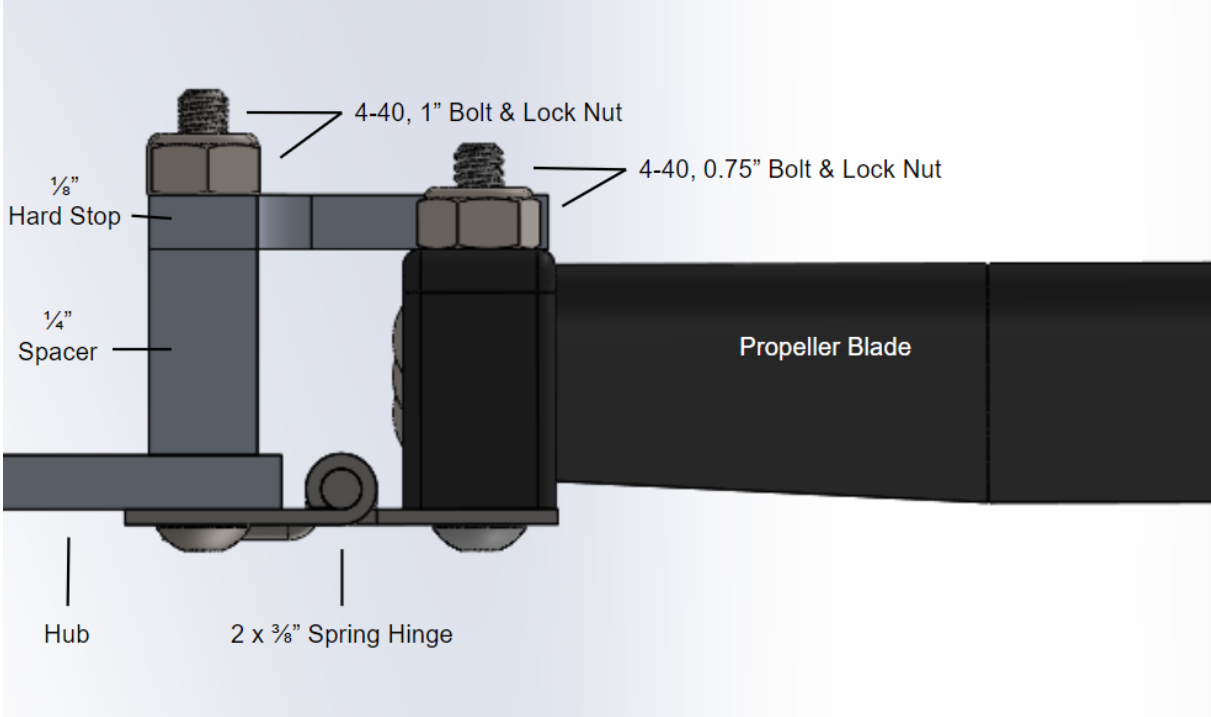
Side view of the extended, horizontal propeller blade position.
